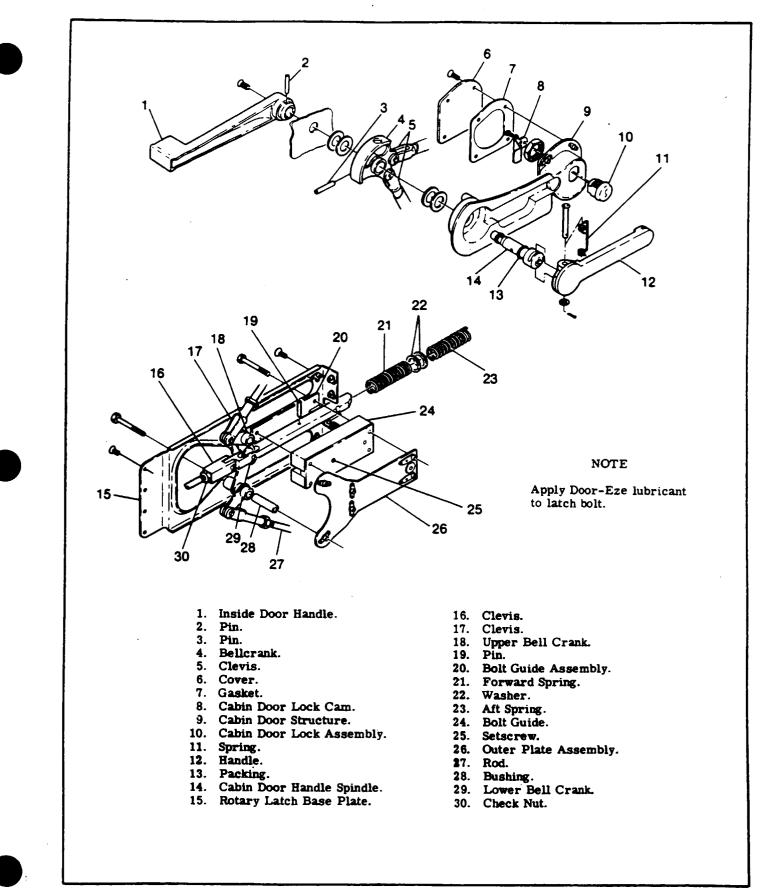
Door Latch Mechanism (Sheet 3 of 4).
